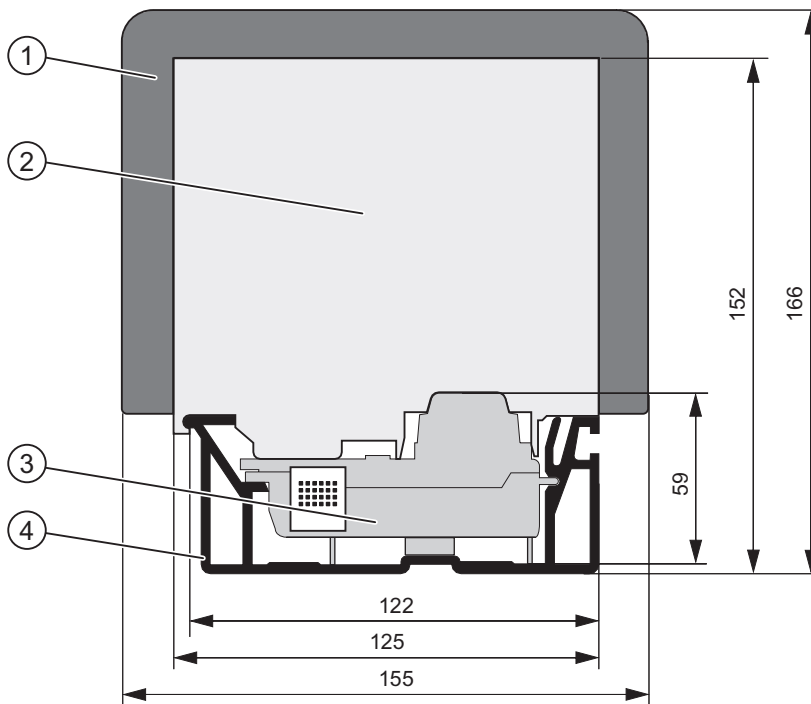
Dimensional drawing of the 2000 mm mounting rail
